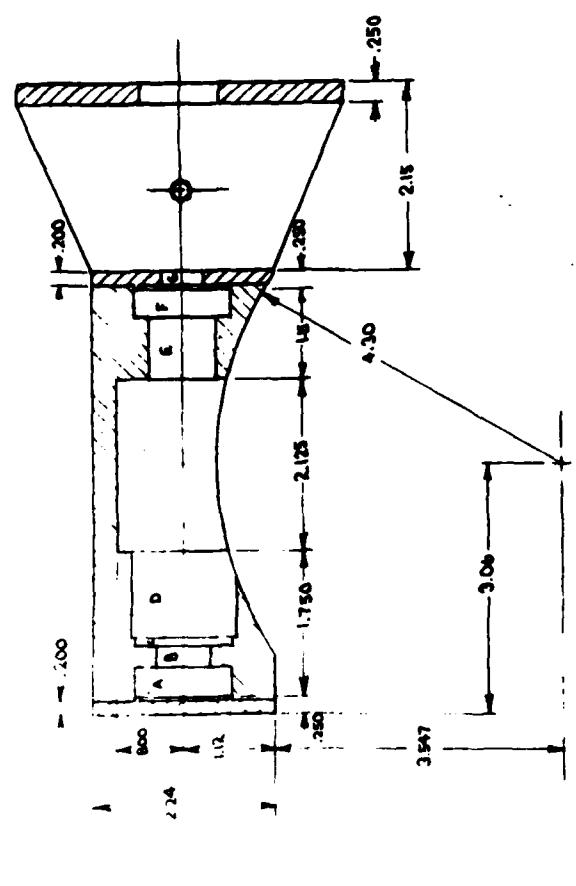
Worm Gear Mounting Shaft - El. Axis
